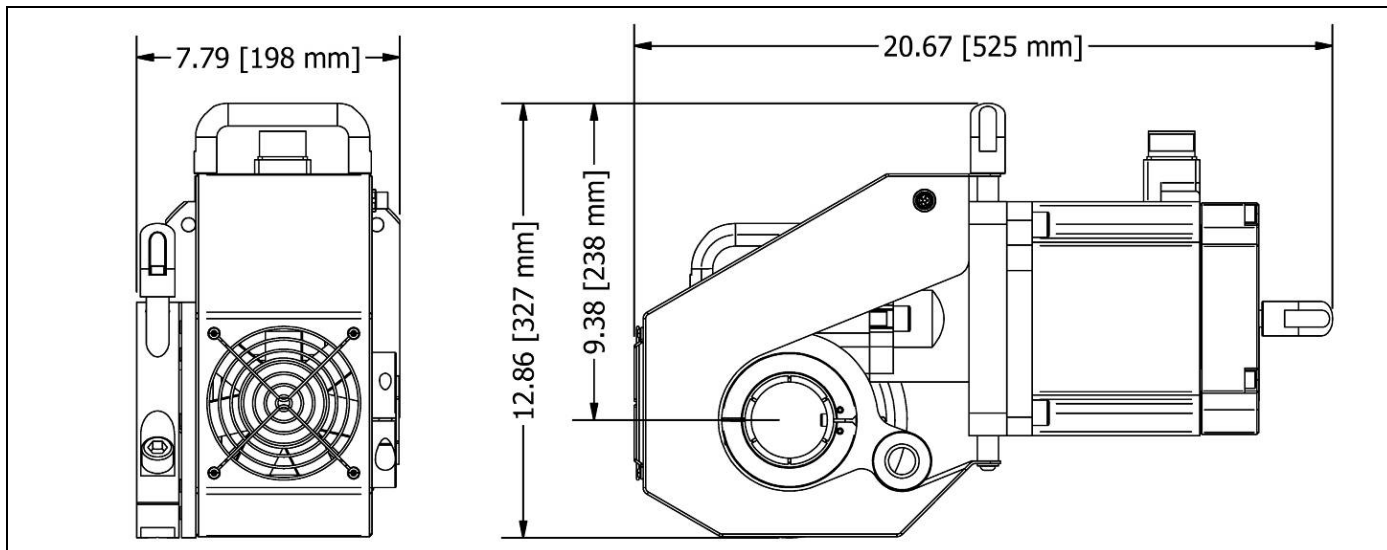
BB5000 SERVO DRIVE DIMENSIONS
